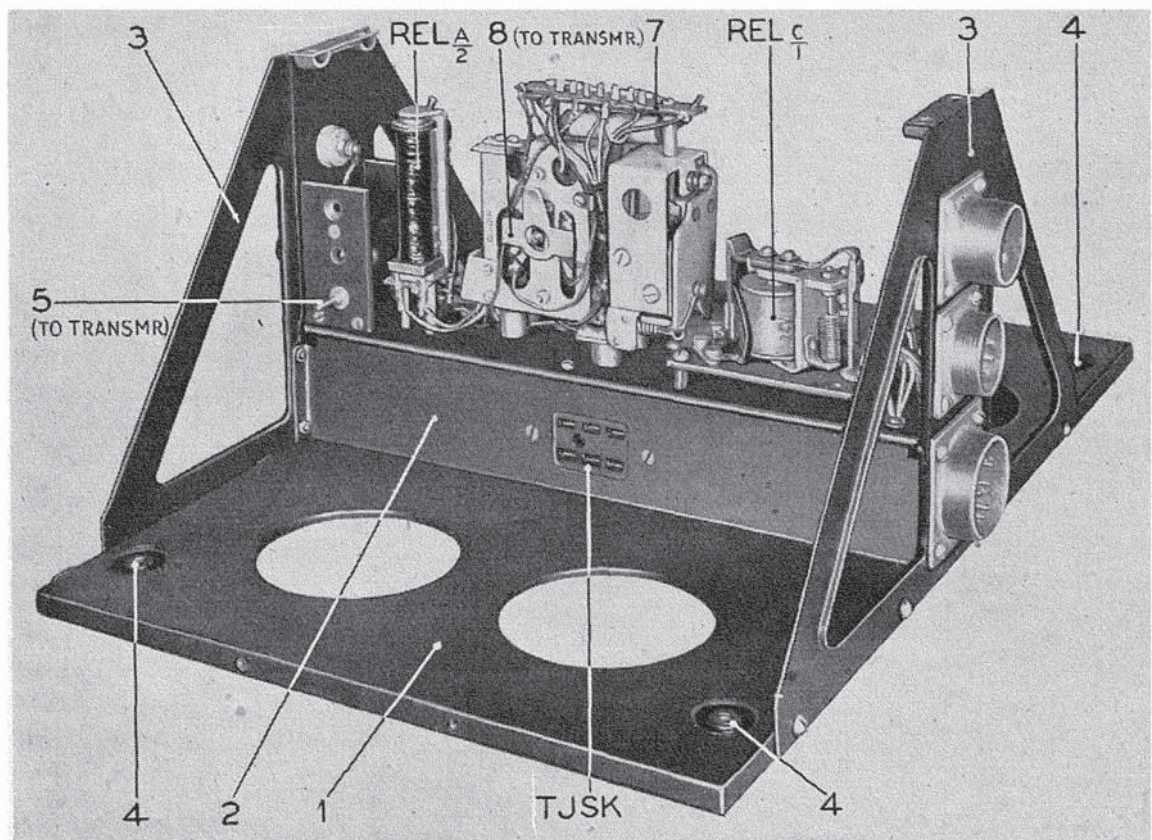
CHASSIS ASSEMBLY, FROM LEFT-HAND SIDE
